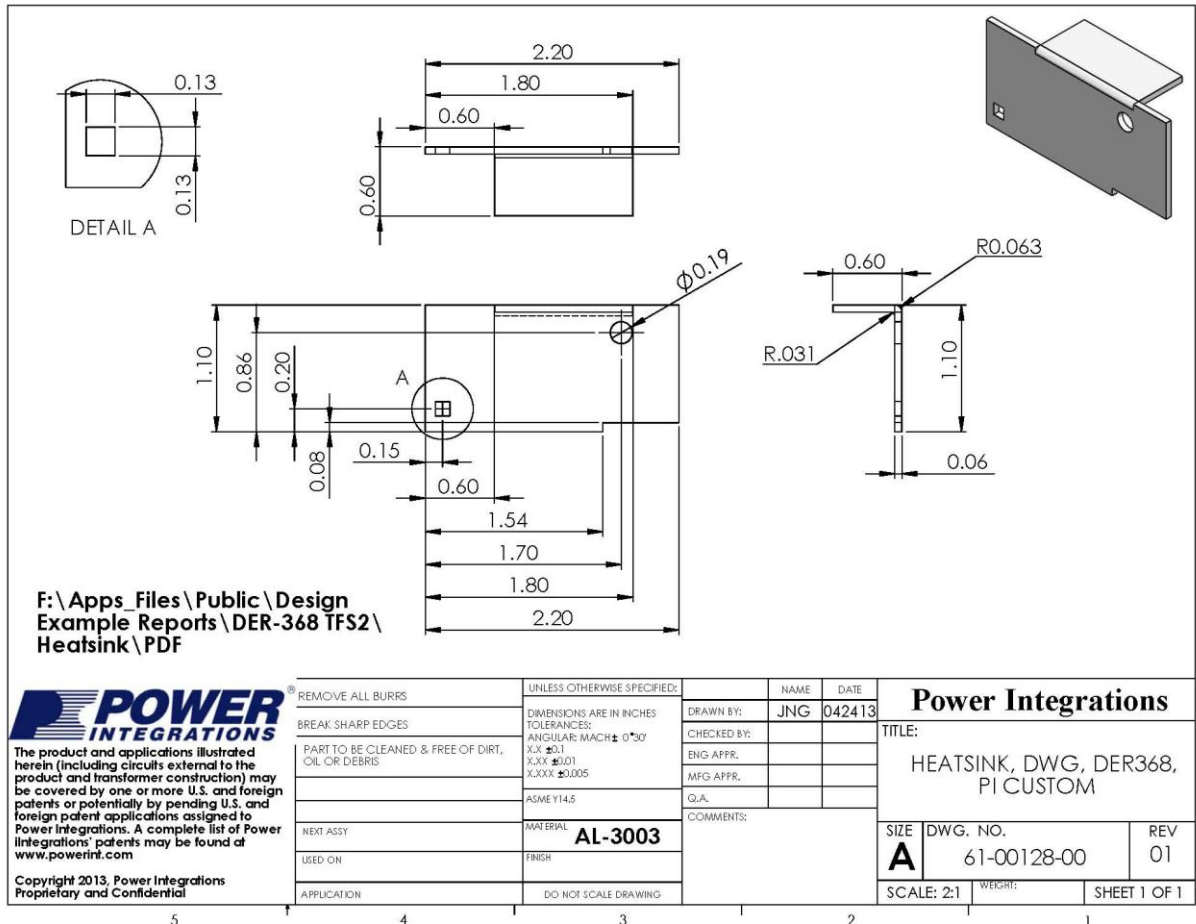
Primary Heat Sink Sheet Metal Drawing.
